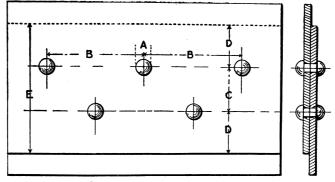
Circumferential Seams, Double Zigzag Riveted
